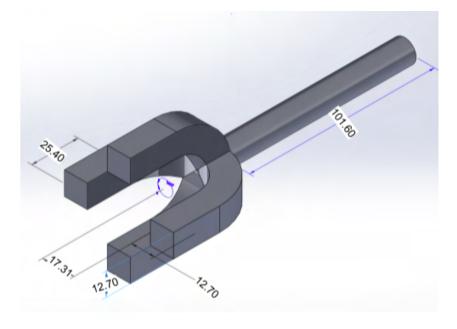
SOLIDWORKS DC Motor Attachment with dimensions shown in mm
